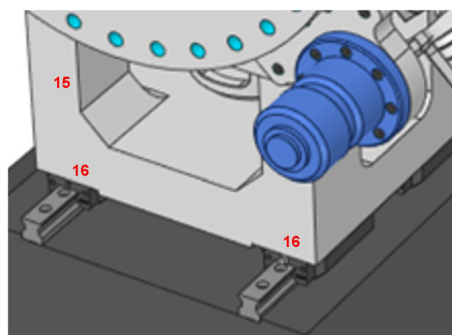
Vacuum chamber bottom support with bottom linear rail guides
